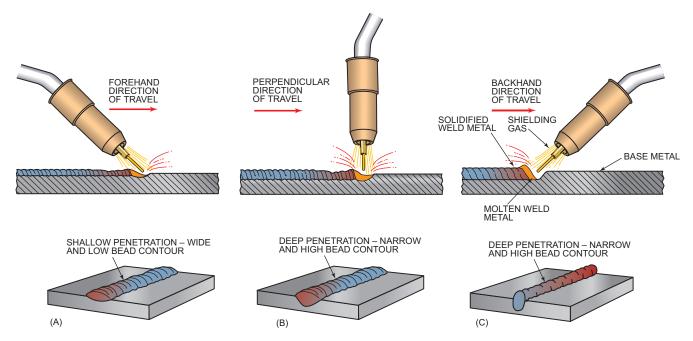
(A) Forehand welding or push angle, (B) perpendicular, and (C) backhand welding or drag angle.
